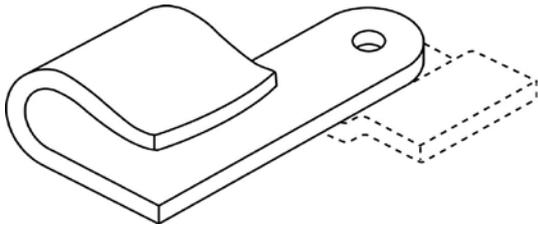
Spring Cover Clamp Welding Bracket Optional
